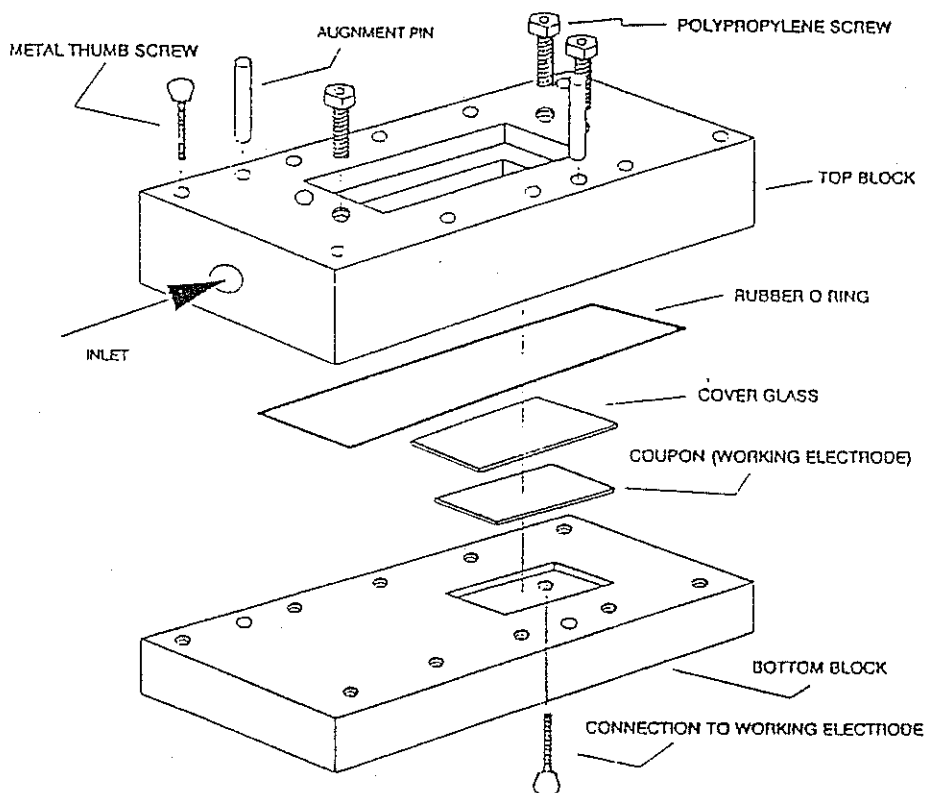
Exploded view of laminar-flow adhesion cell illustrating cell assembly.
